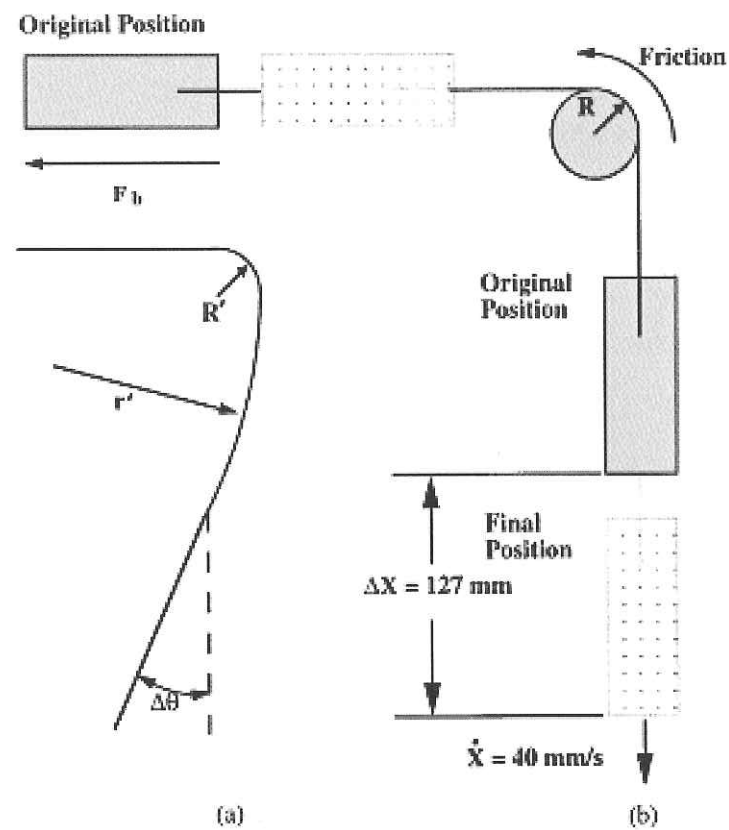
Draw/bend test geometry (a) specimen shape after unloading (b) original and final shapes during testing [14].
